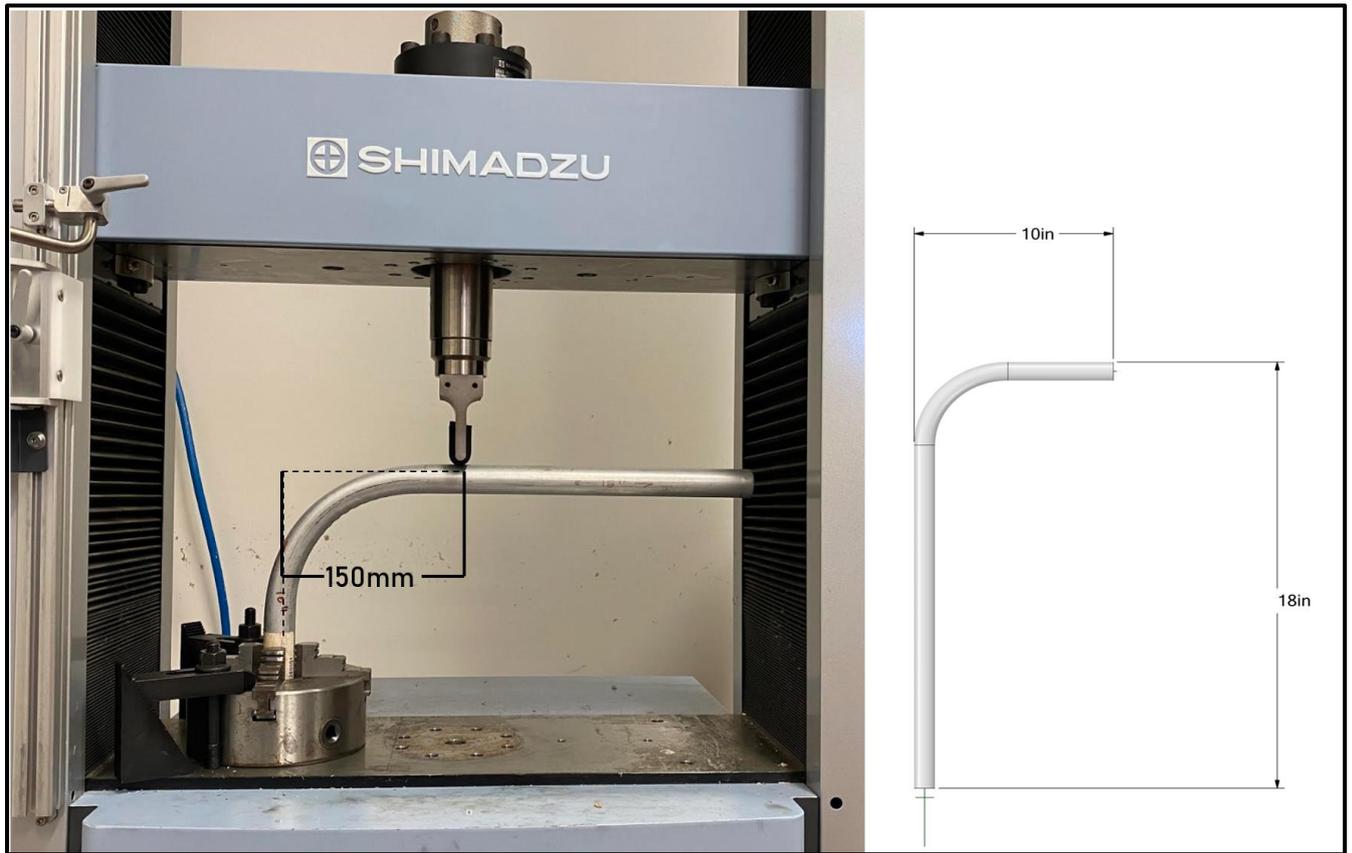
Corner Piece Compression test setup for D4 Corner piece, with dimensions (Corner radius and diameter dimensions included within Part 7 – Detailed Model of Designs).
